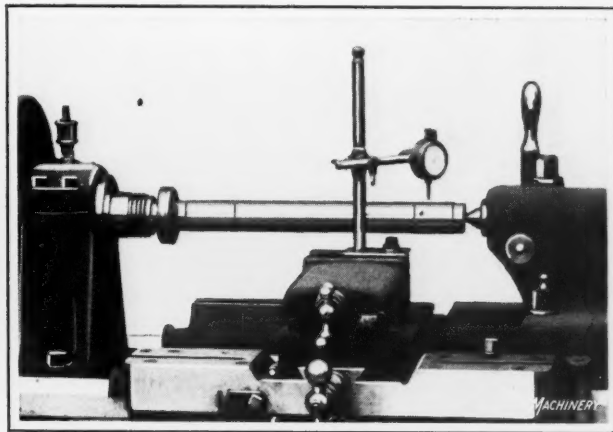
Determining the Alignment of the Tailstock Spindle with that of the Headstock
